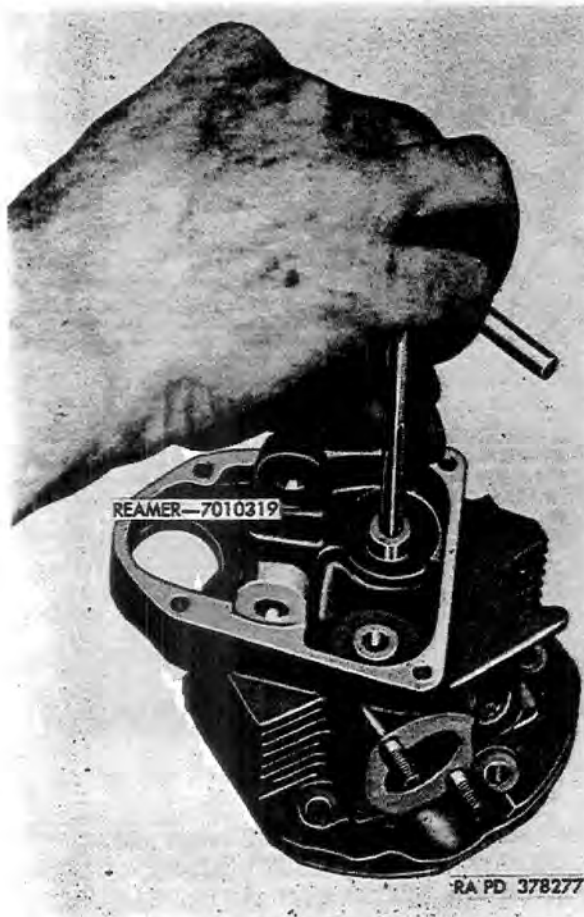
Reaming exhaust valve guide, using reamer 7010319.
